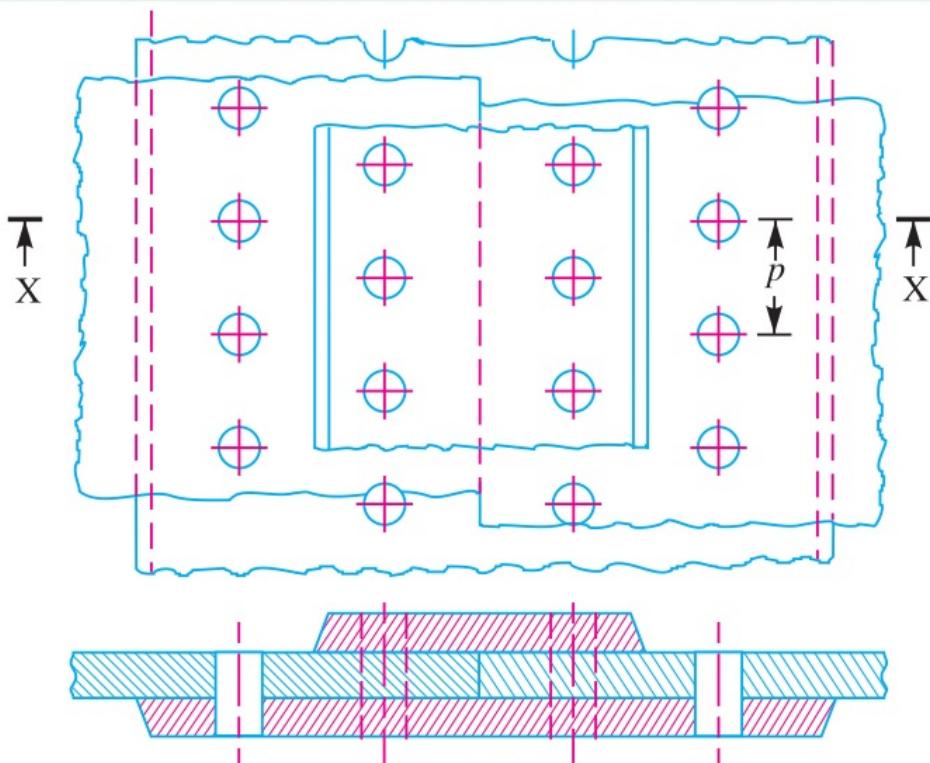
Double riveted double strap (unequal) butt joint with zig-zag riveting.
